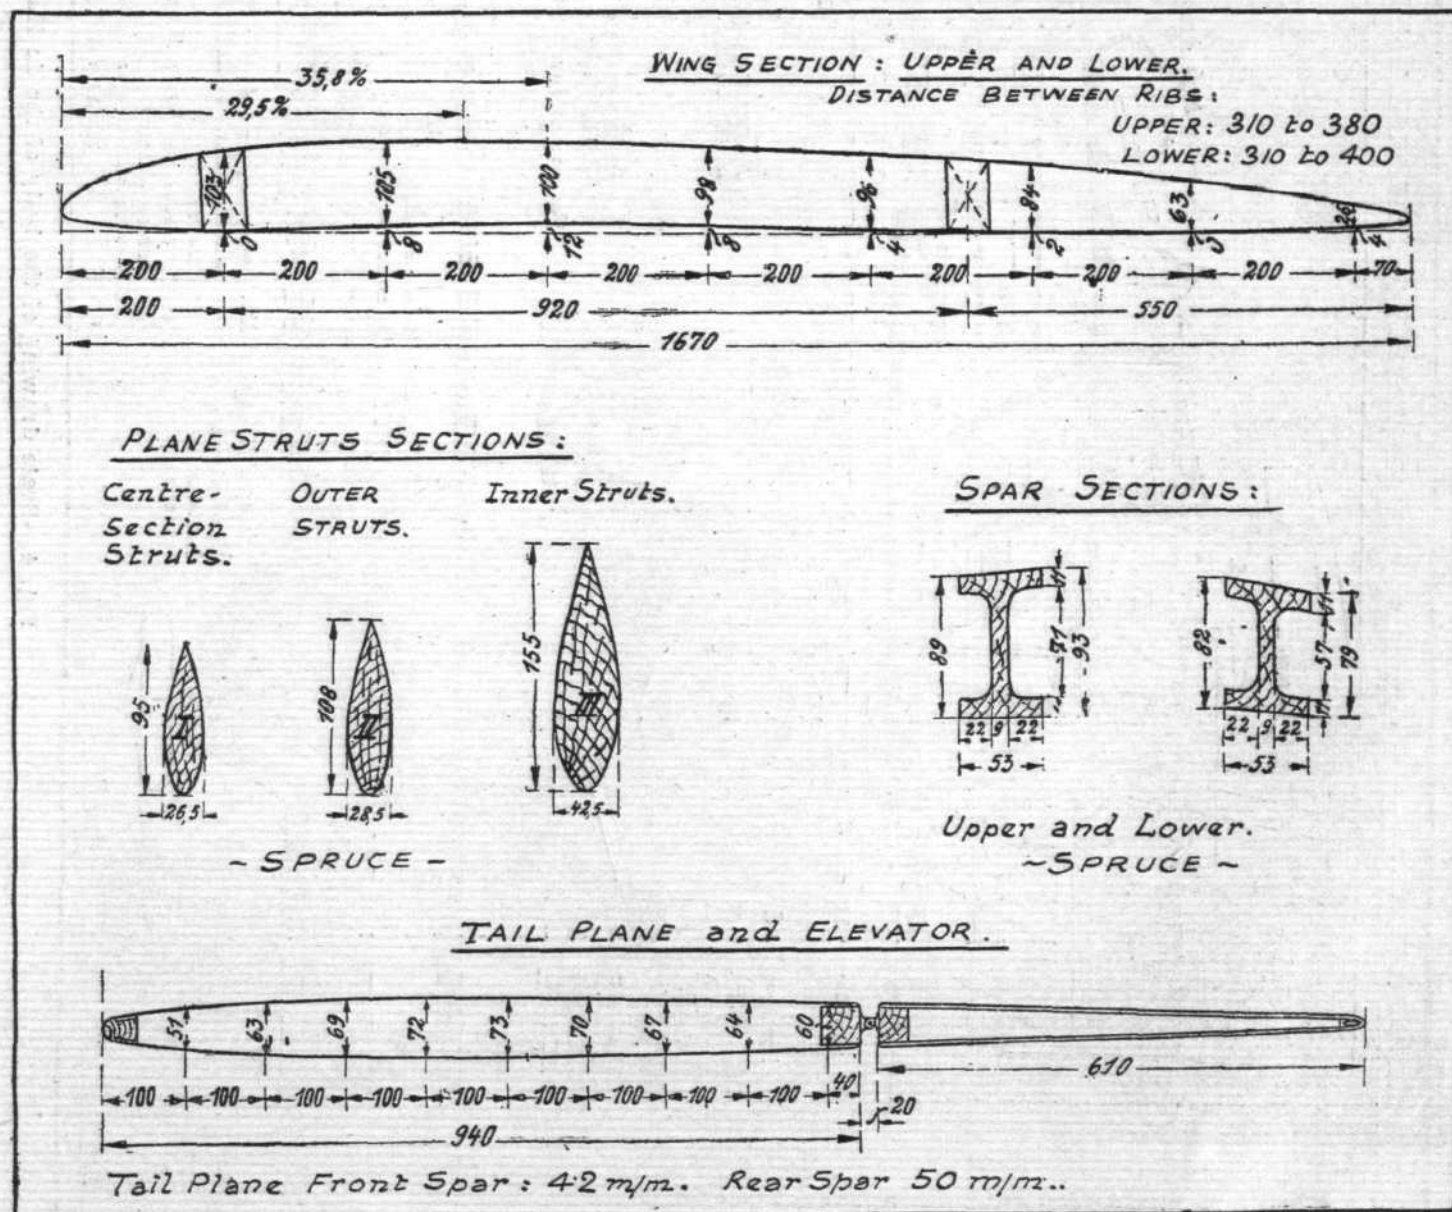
Wing section and tail plane section of the de Havilland IV biplane.
